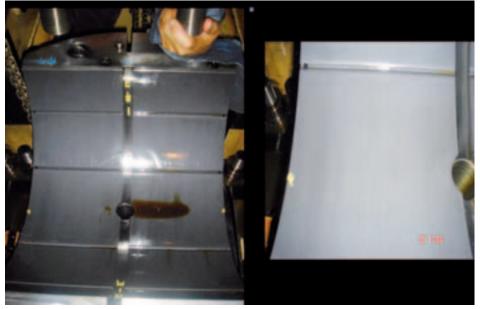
Synthetic overlay on AlSn40 crosshead bearing shell after 10,000 hours
